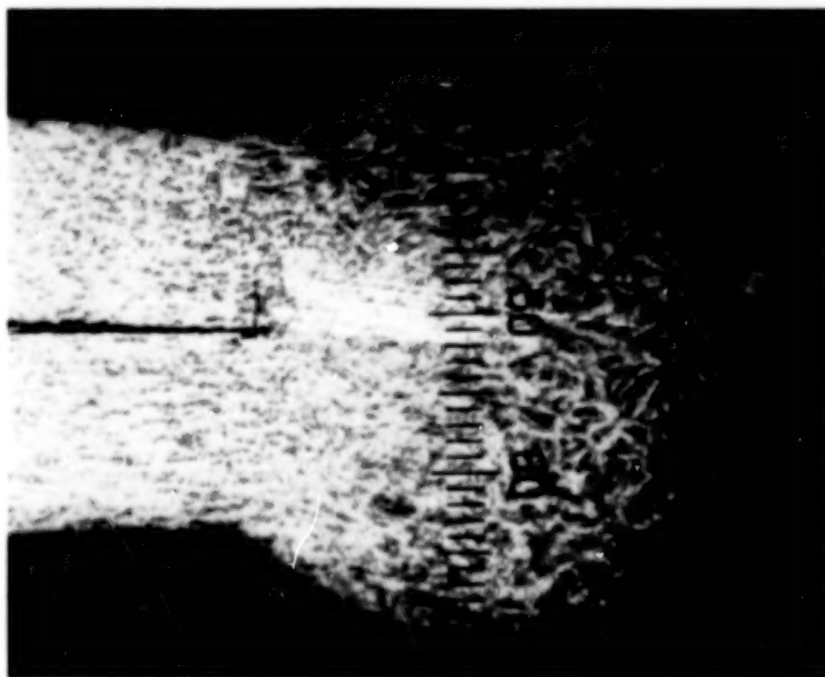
Photomicrograph Showing a Fatigue Crack Starting at the Crotch of the Weld Bead. Note Uniformity in Plate Thickness and Weld Bead (Each Increment Equals 0.00023 Inches)
